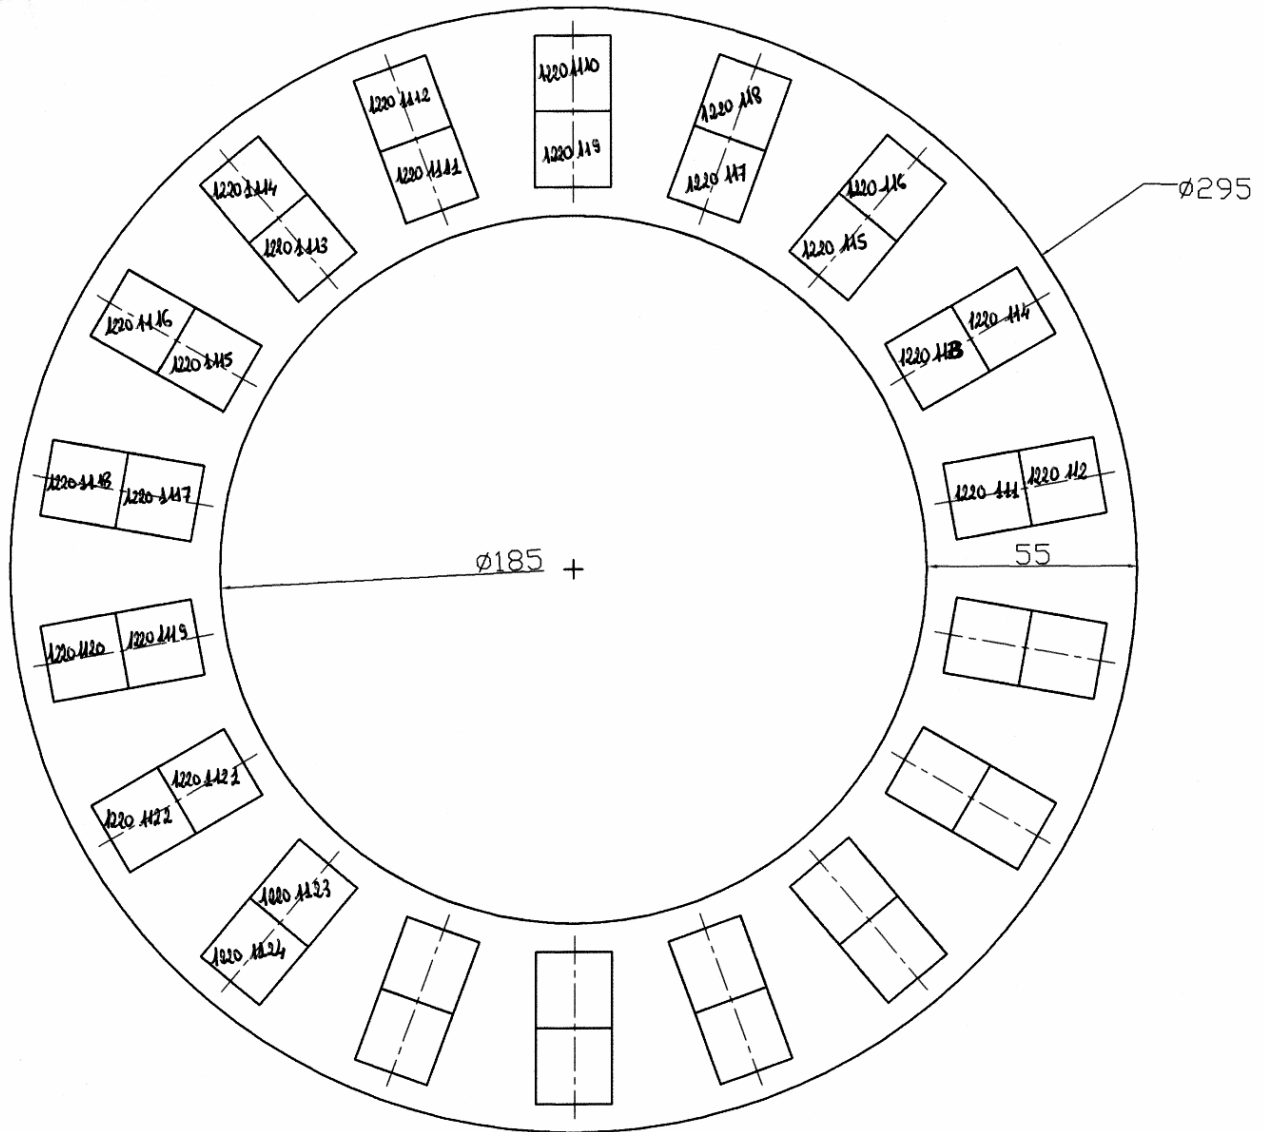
Location of creep test specimens in the P91 steel (1)
